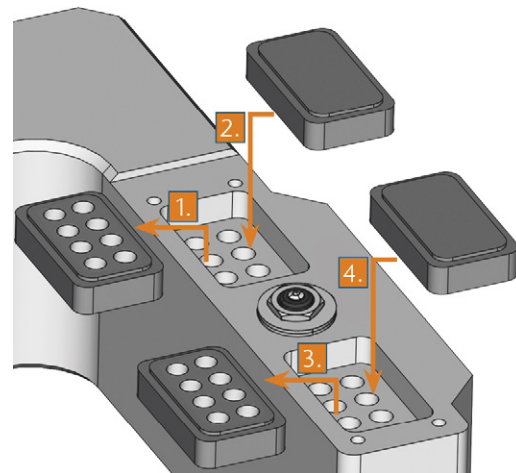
NEW TOOL MAGAZINE INSERTS (RIGHT, WITHOUT TOOL POSITIONS) REPLACE OLD INSERTS (LEFT, WITH TOOL POSITIONS)
